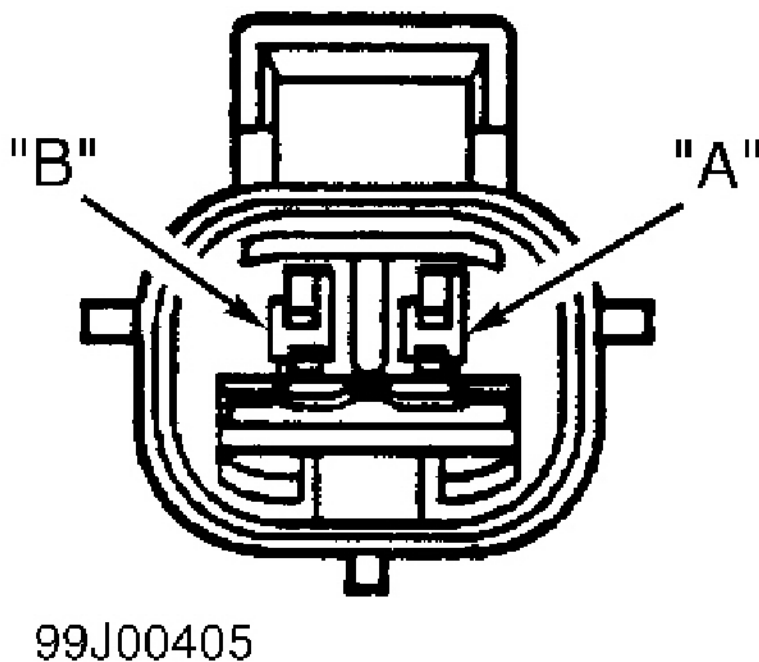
Identifying Side Impact Sensor (SIS) Connector Terminals
